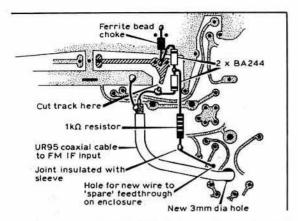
Modifications to RX80 pcb for fm i.f., viewed from track side
